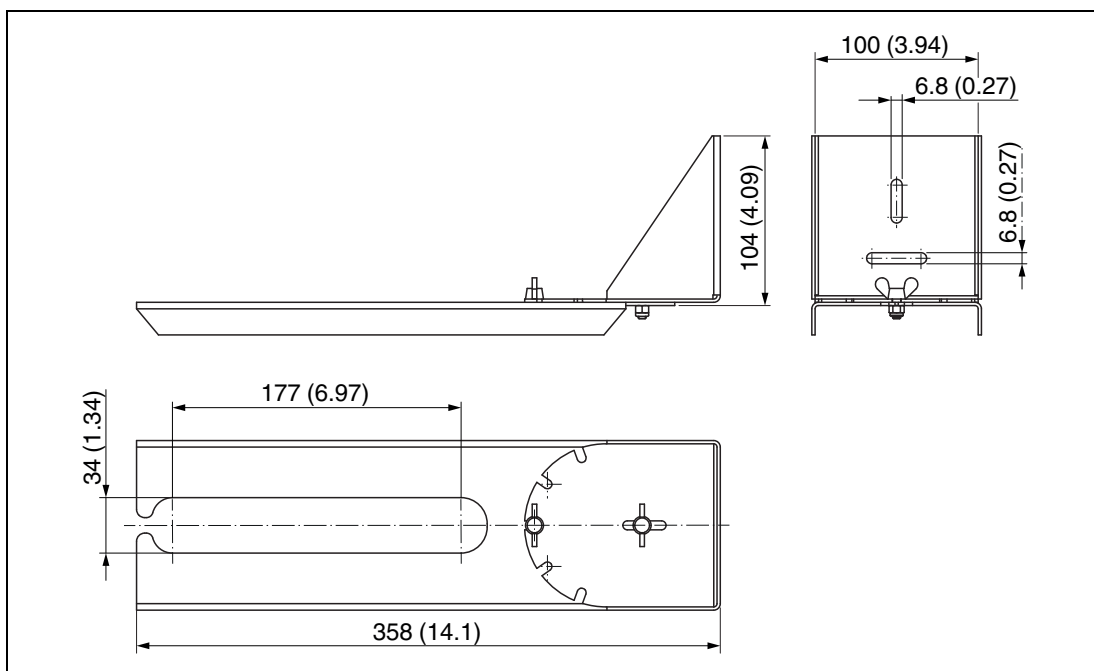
Dimensions of the pivotable mounting bracket, engineering unit: mm (inch)
